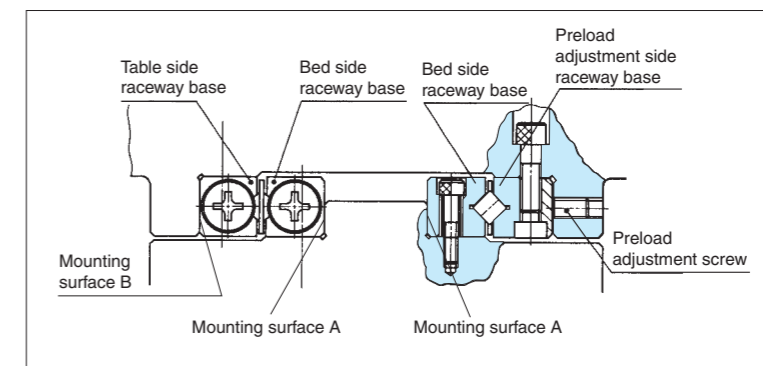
Typical mounting of Cross Roller Way Bearing Unit
